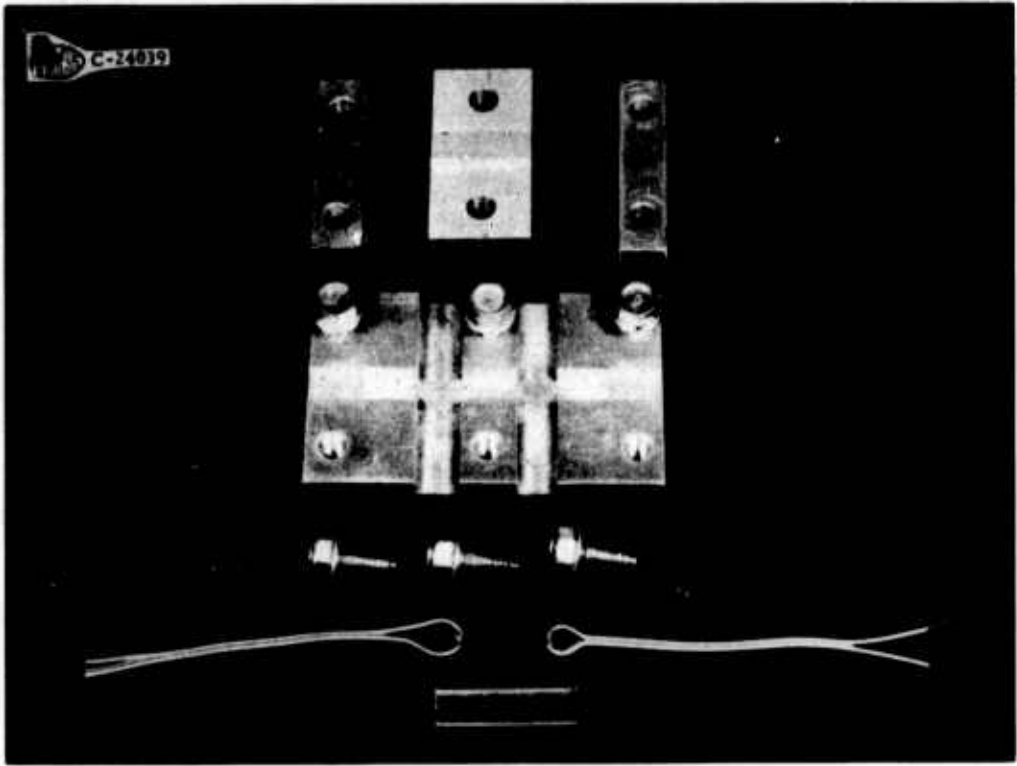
TRANSDUCER ASSEMBLING MOLD FIXTURE
